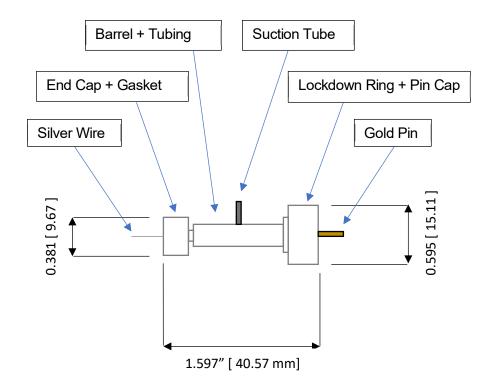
Electrode Holder Figure dimensions are in "inches [mm]".
